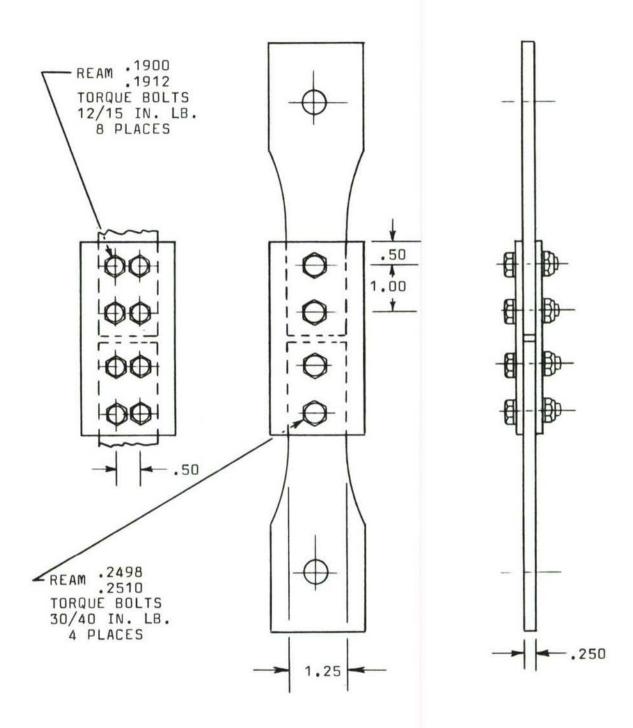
4 and 8 Bolt Joint Specimen Designs.
